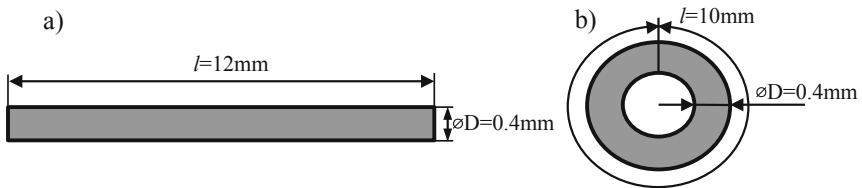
Investigated fiber geometries. Rod-shaped (a) and ring-shaped (b) fibers.
